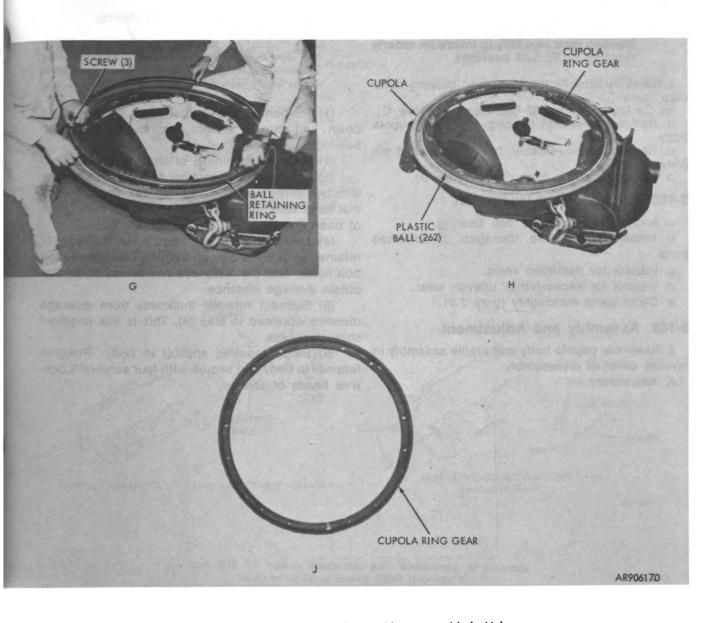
M1 cupola disassembly or assembly (vehicles serial numbered A3001 thru A3374) (3 of 3).
